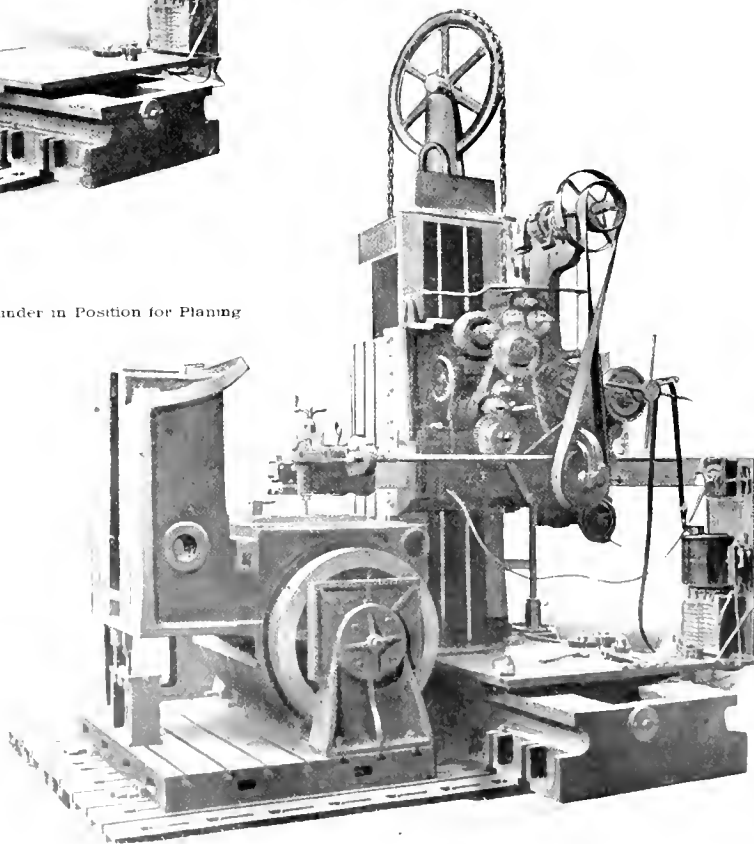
Morton Cylinder Planer equipped with Port Milling Attachment
